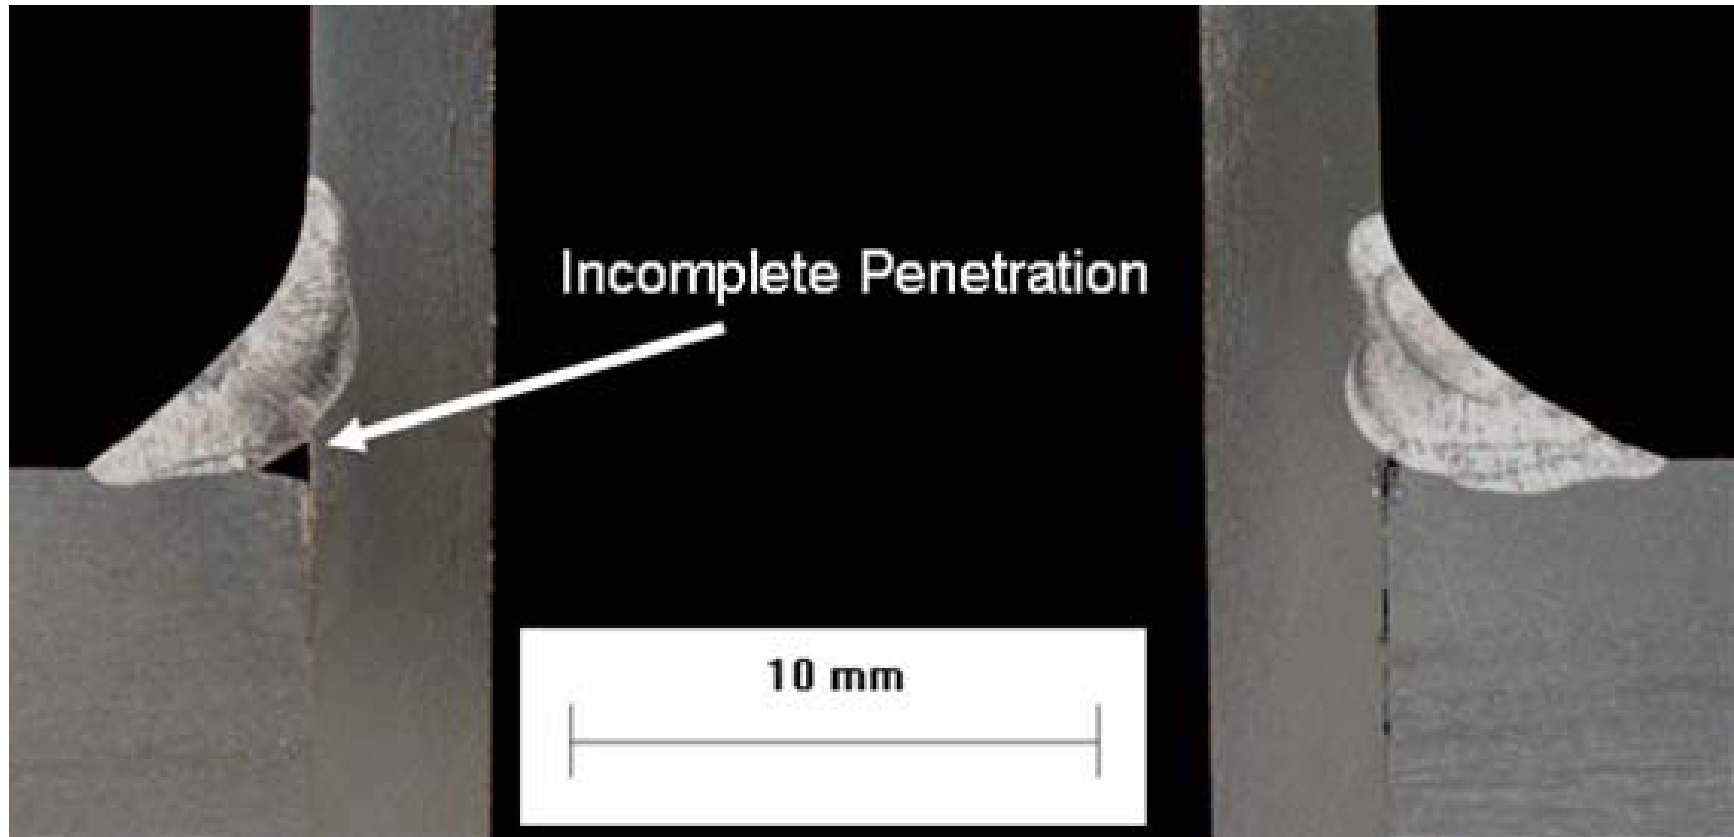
Cross Section of EWI Consumable Insert Weld
